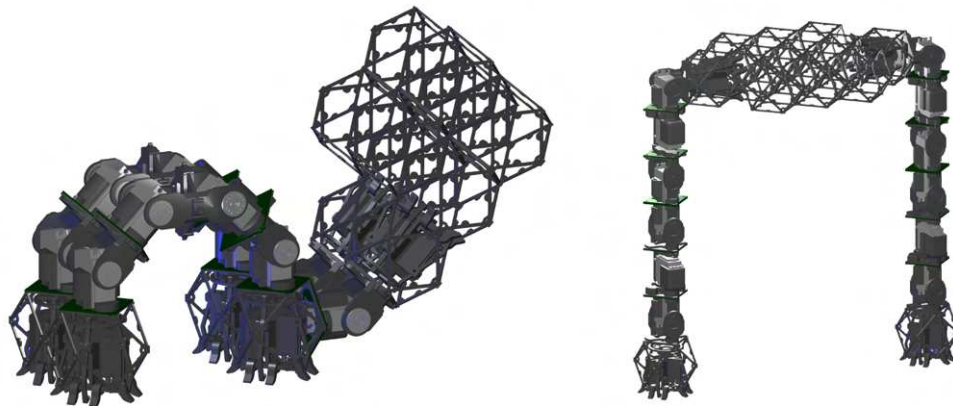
Renderings of notional alternate robot geometries with larger payload carrying abilities from the design tool. (Left) a parallelized version of the current assembler, shown carrying 8 voxels. (Right) Two of the current robot configurations holding 9 voxels together, acting temporarily as one larger robot.
